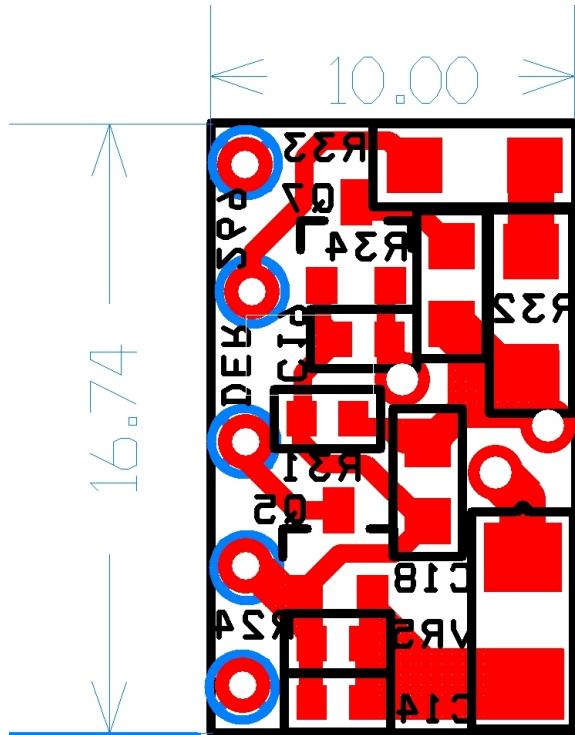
TRIAC Active Load Daughter Board PCB Layout, Top.
